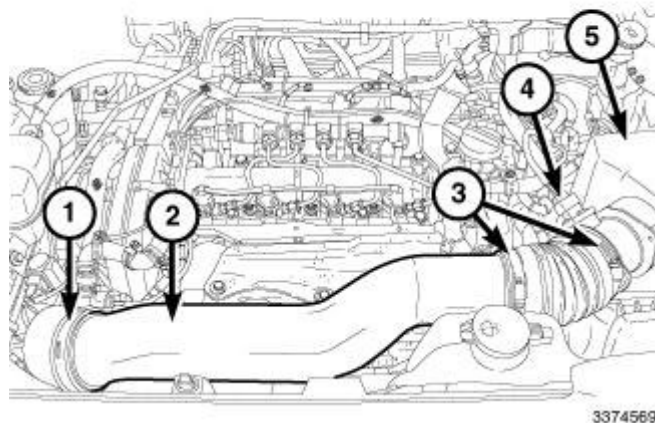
Upper Clean Air To Turbocharger Tube & Air Cleaner Assembly
